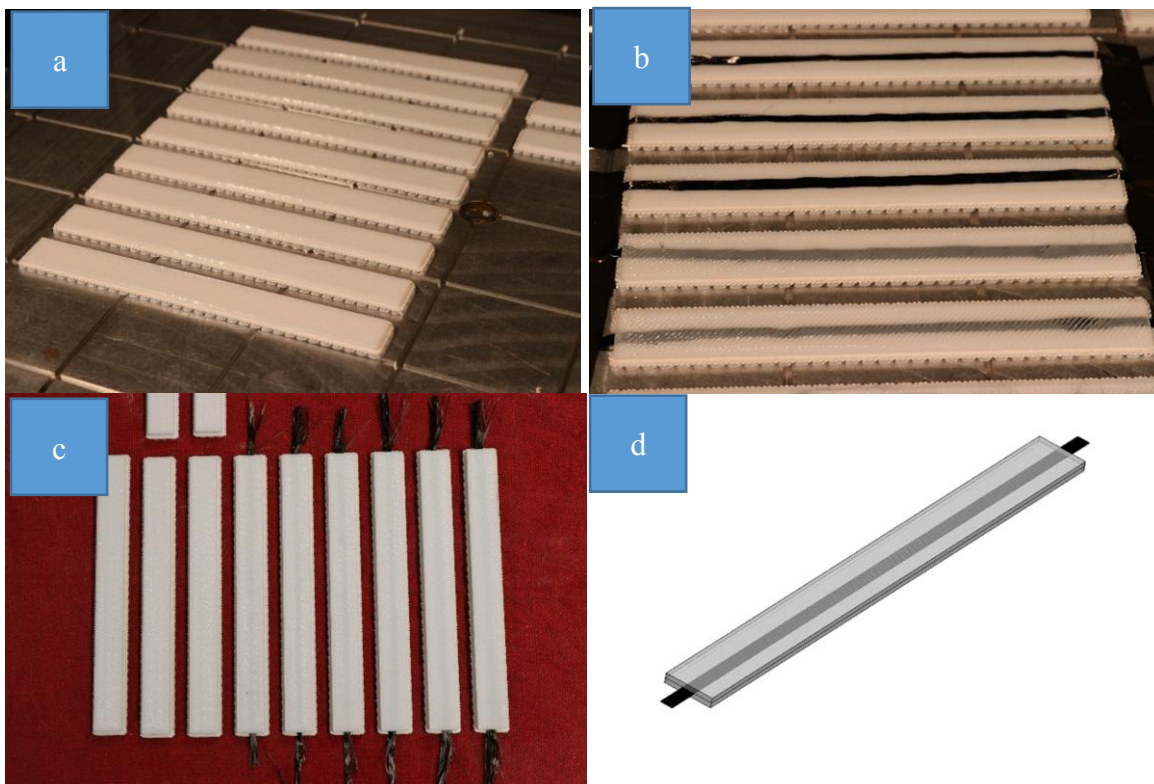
2 Process involved in fabrication of 3D printed ASTM D790 parts for flexural test: (a) printing paused at certain layers, (b) during the printing of immediate next layer after CE embedment, (c) final parts with and without CF, (d) cartoon of the specimen.
